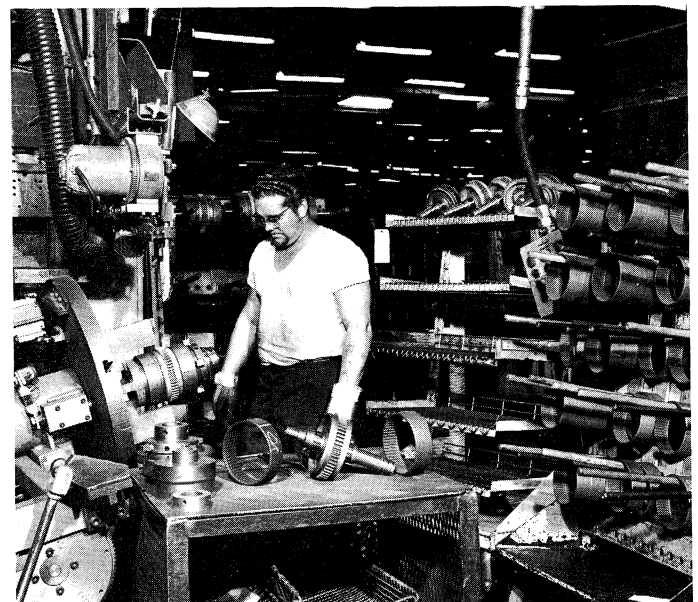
Submerged-arc welding of (2) clutch drums to welded gear assembly as shown in Fig. 8-15.
